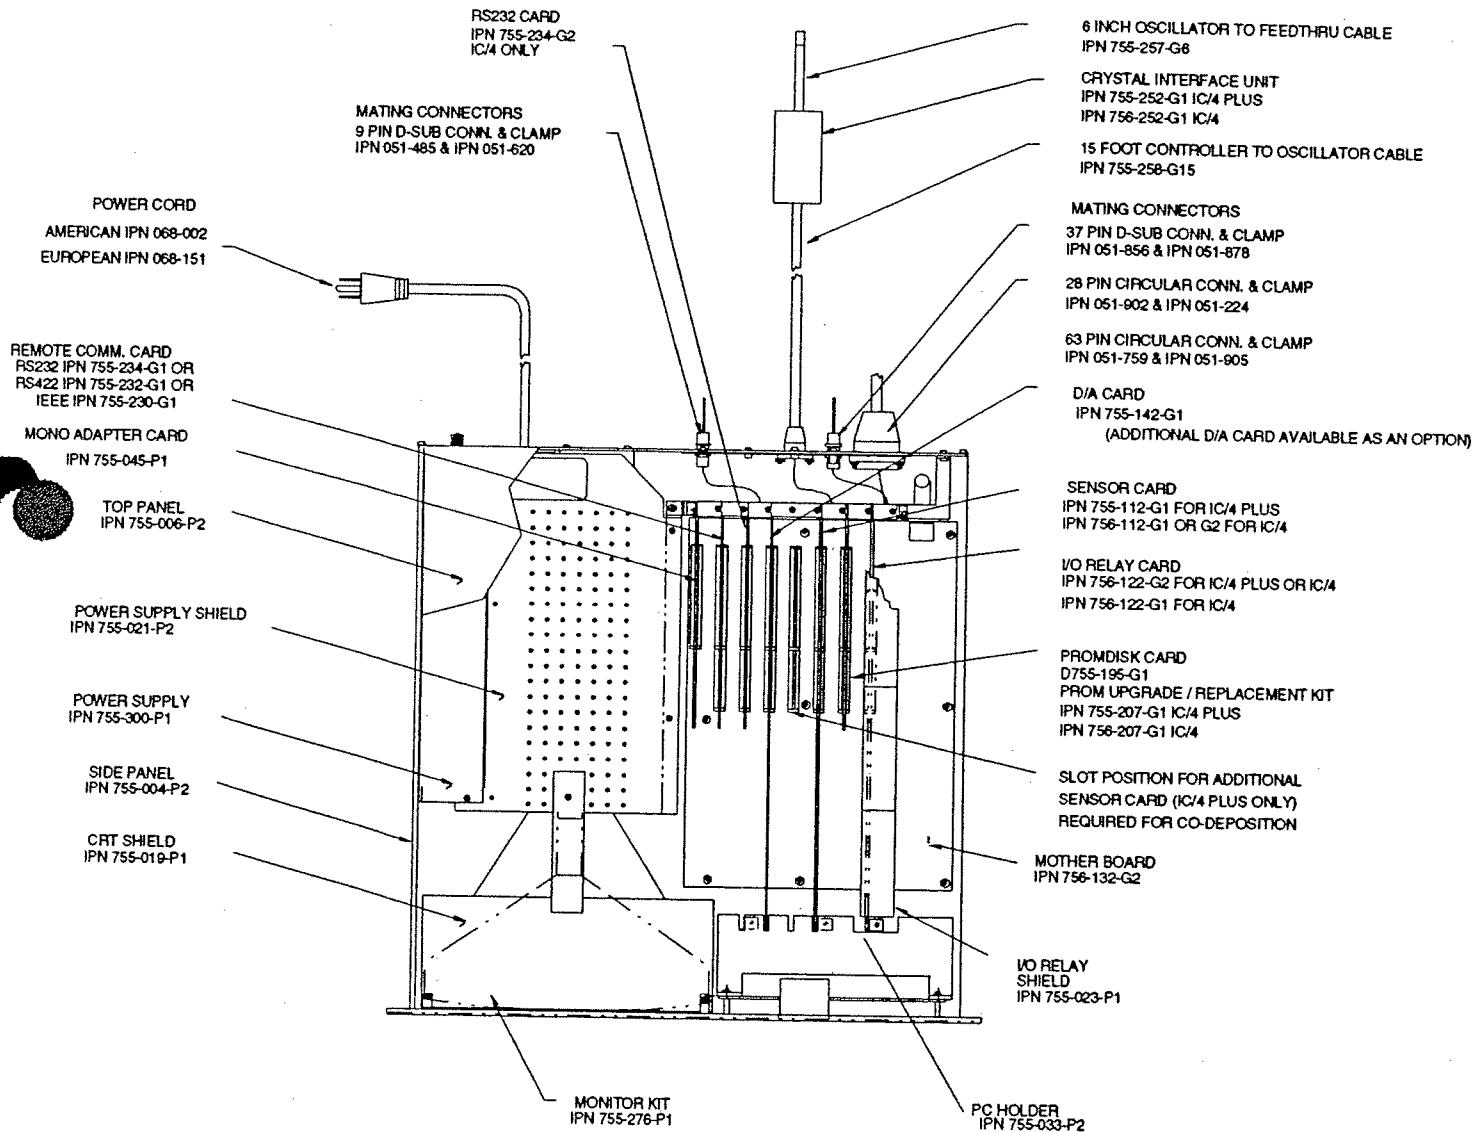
IC/4 Schematic Assembly (Rev.A)
